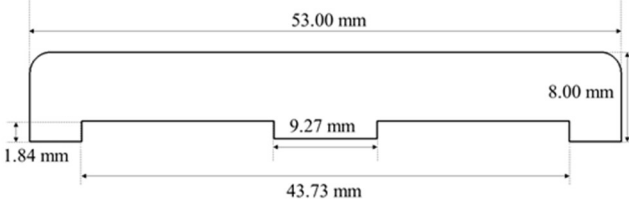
Schematic of the designed E core (depth = 39.47 mm).
